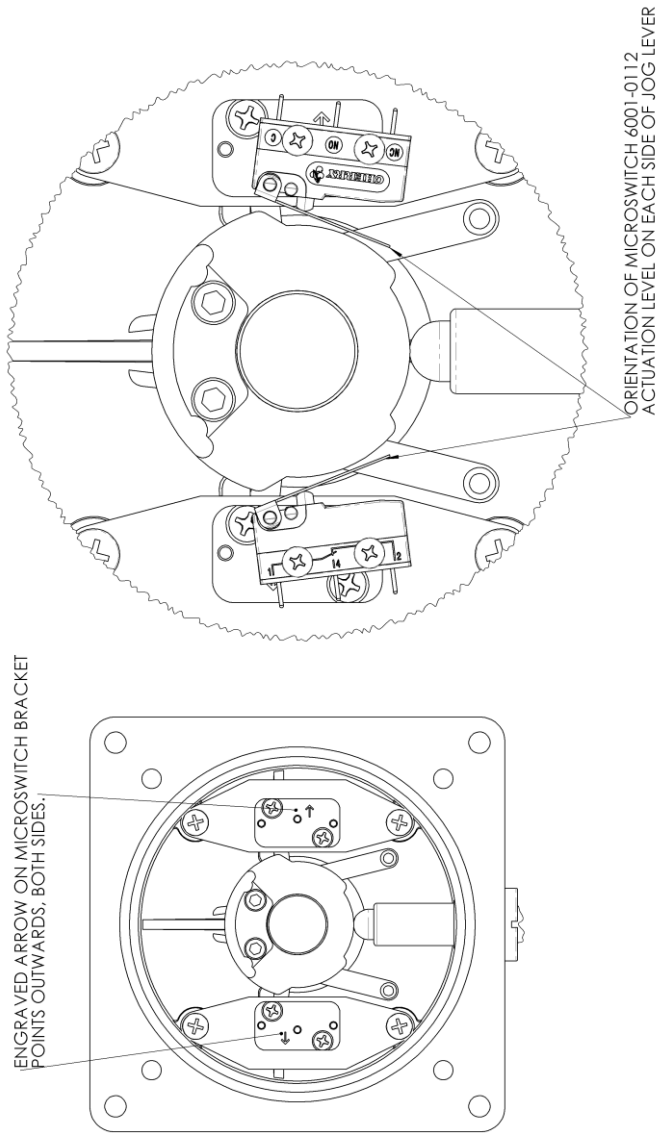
Placement of microswitch and mounting bracket inside jog lever housing
